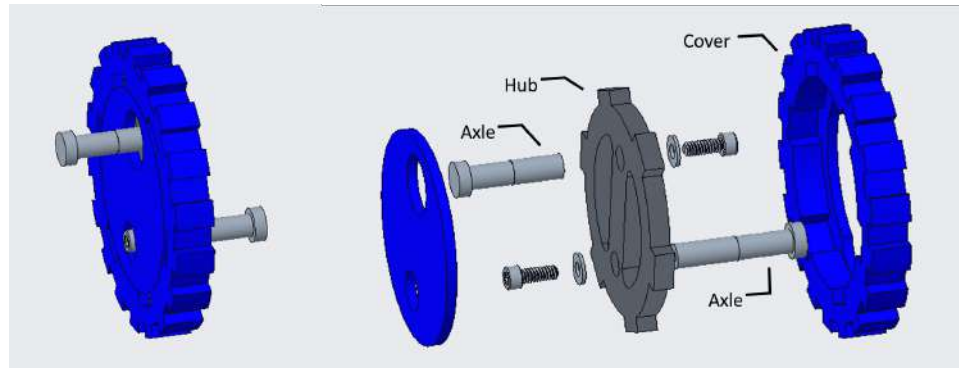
Exploded view of the passive wheel assembly of the motor. Note the splines on the hub and the wheel cover used to secure the assembly together.
